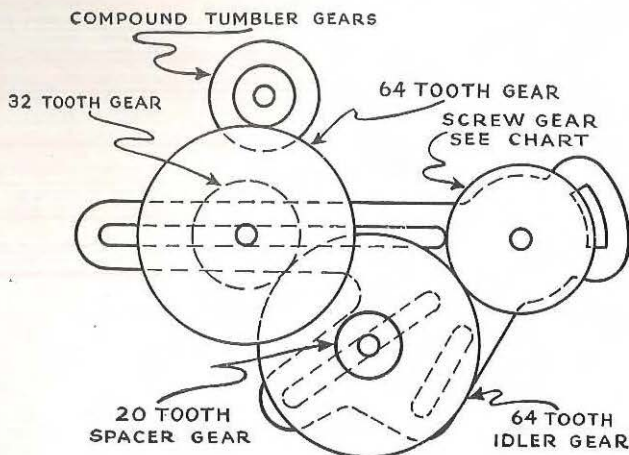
Gear set-up for 36 through 64 threads per inch (see page 140).
